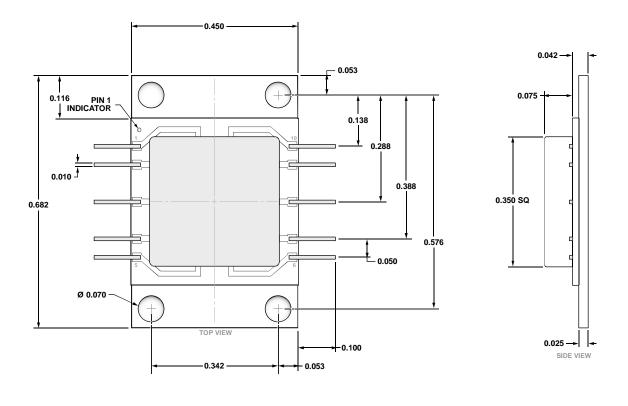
10-Lead Module with Flange Heat Sink [CFMP] (MF-10-1) Dimensions shown in inches
